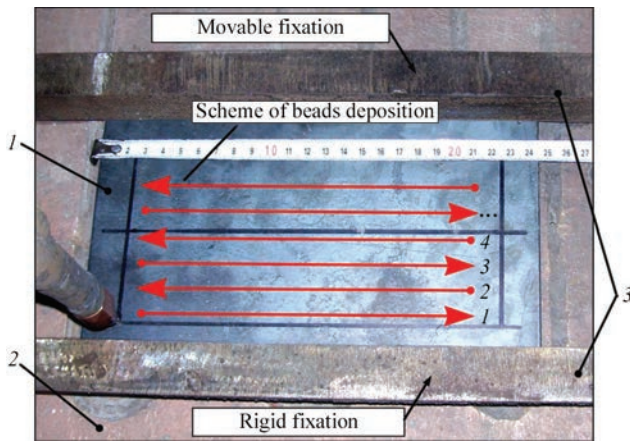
Appearance of plate being surfaced (1), fixed on welding table (2) by clamping straps (3) with indication of scheme of beads deposition
